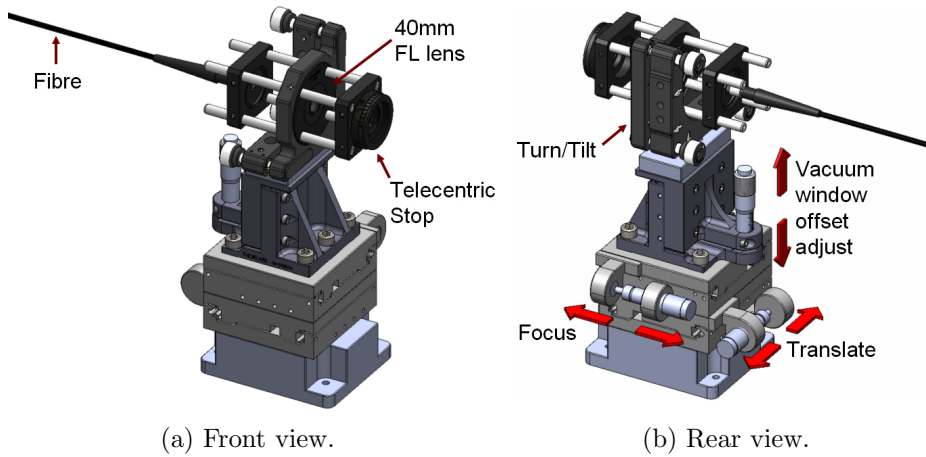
The external section of the input relay for the vacuum chamber prototype.
